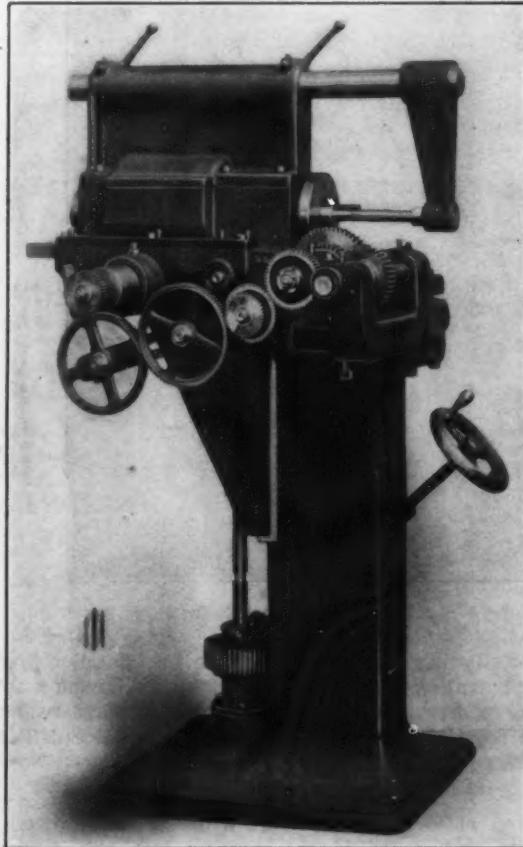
A New Spur Gear Hobbing Machine Built by the Reynolds Machine Company, Moline, Ill.
